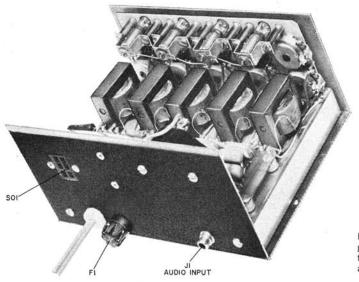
Rear view of color organ with cover removed shows fuse holder F1, input jack J1, and color lamp receptacle SO1.
